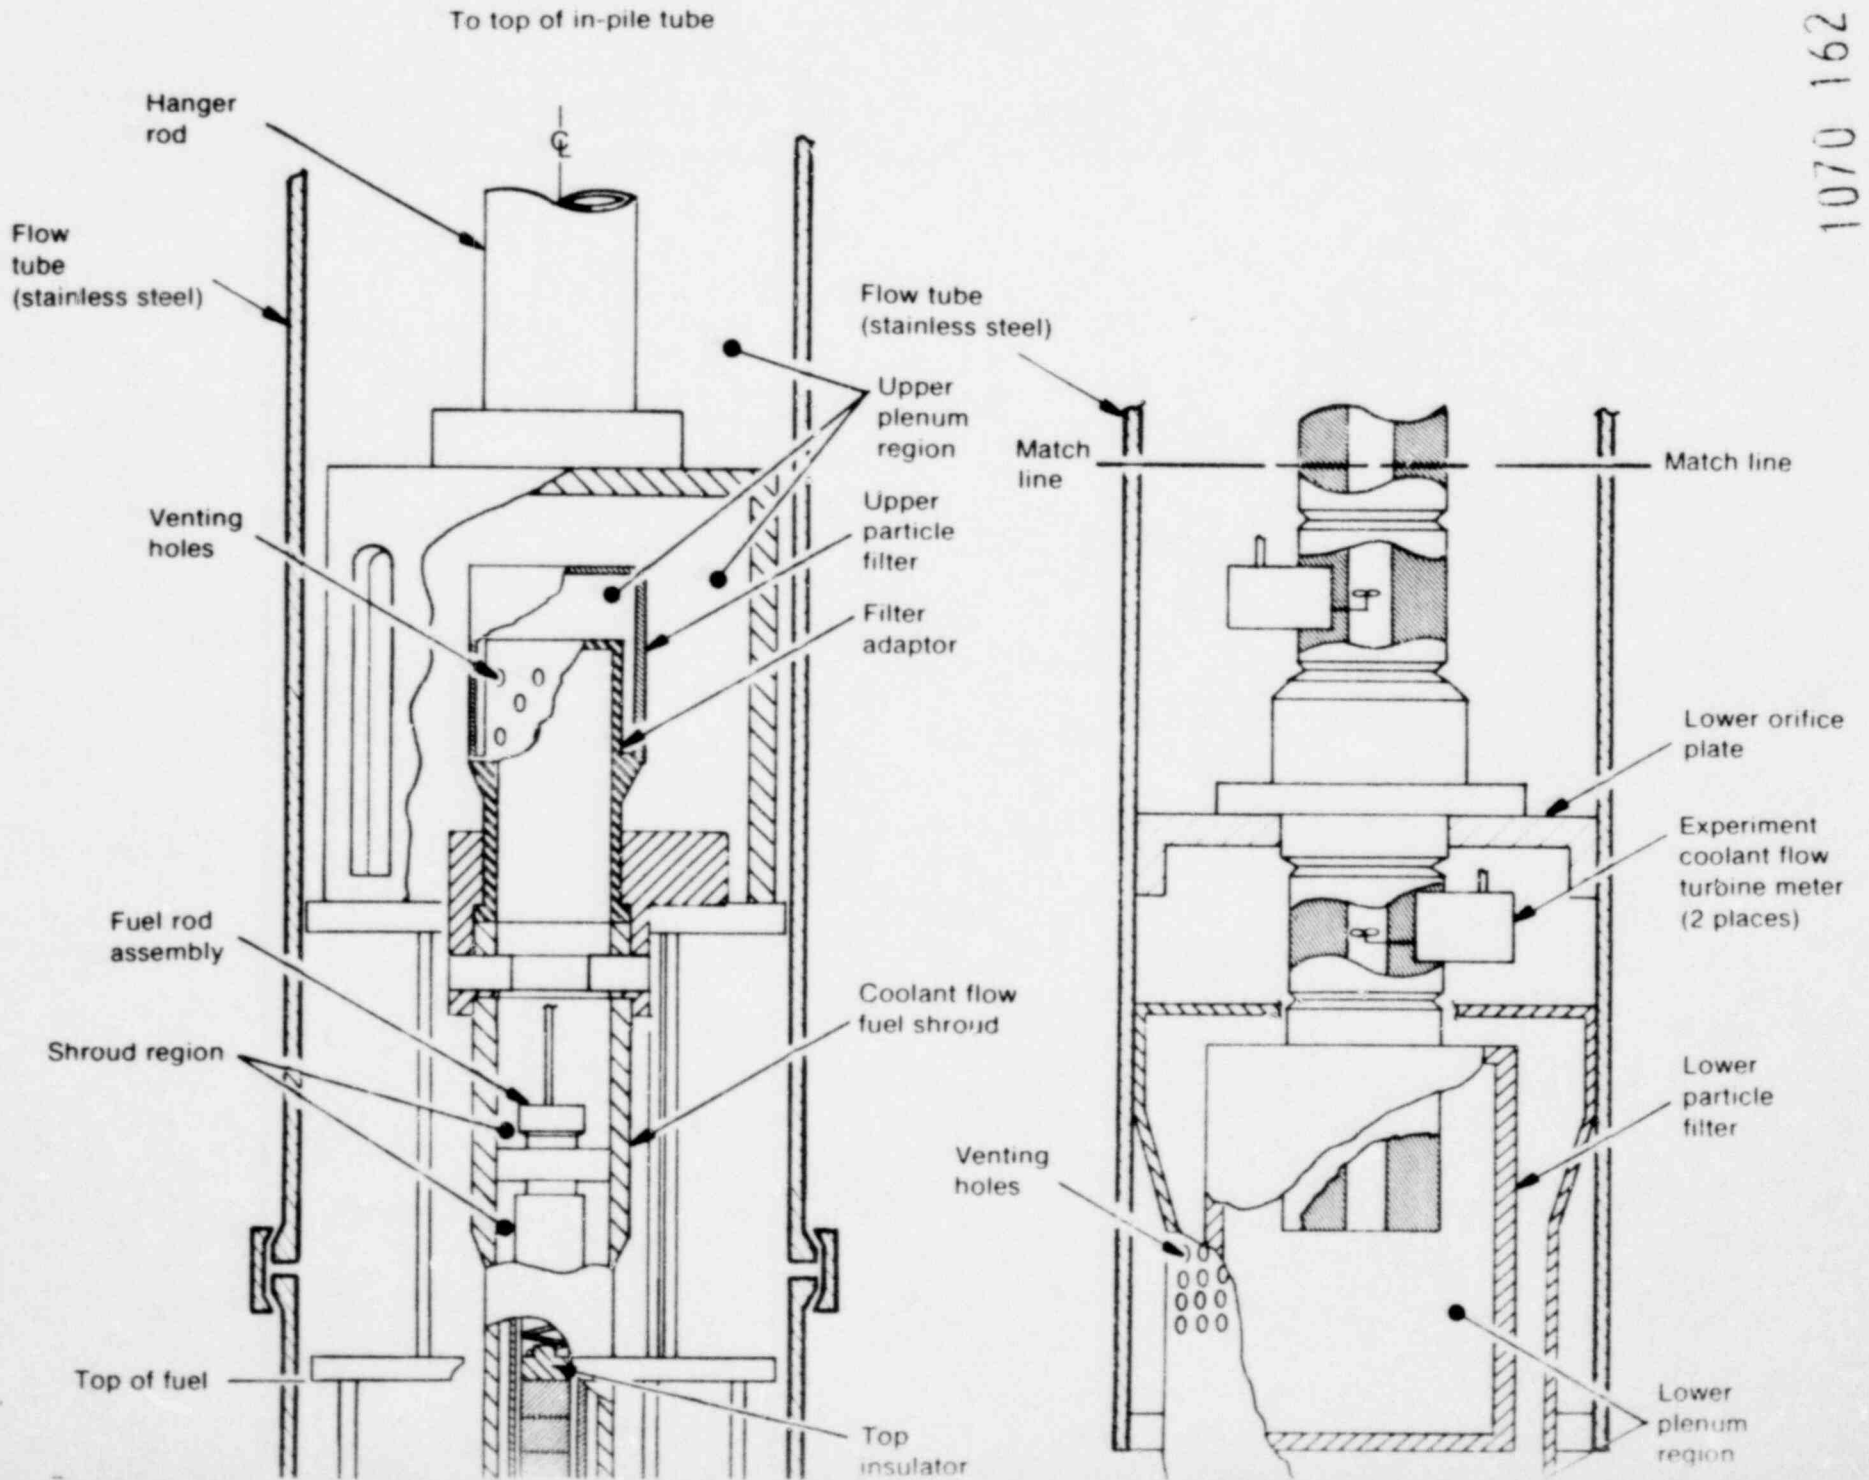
Test PCM-1 fuel rod and test train assembly.
